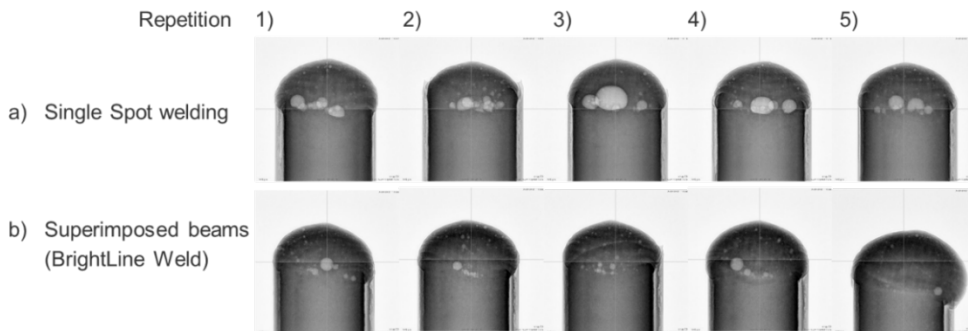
xRay images of the welded hairpins to compare pores inside hairpins after a welding process with a single spot, laser power $P = 2$ kW (line a)1-5)) and after a welding process with two superimposed laser beams, laser power $P = 4$ kW (b)1-5)). All other parameters see Table 1. From both welding setups five hairpins with repeated welding parameters each are shown.
